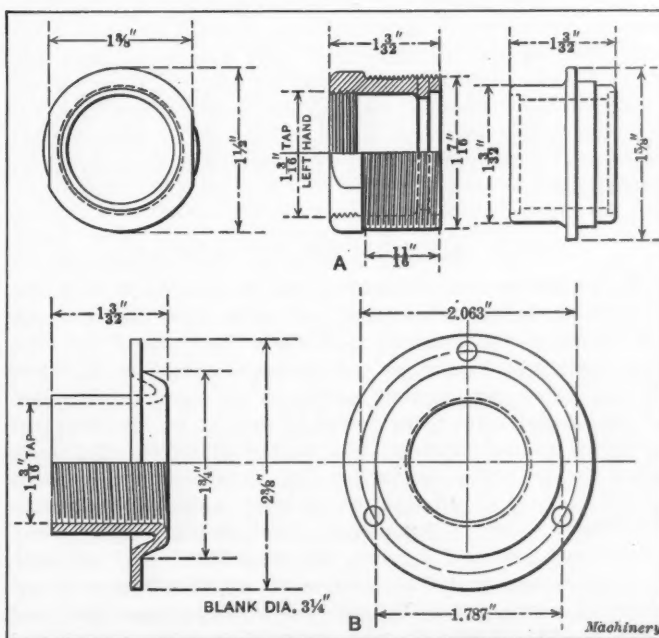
(A) Ball Race Housing machined in Gridley Automatic; (B) Ball Race Housing pressed from Sheet Steel
